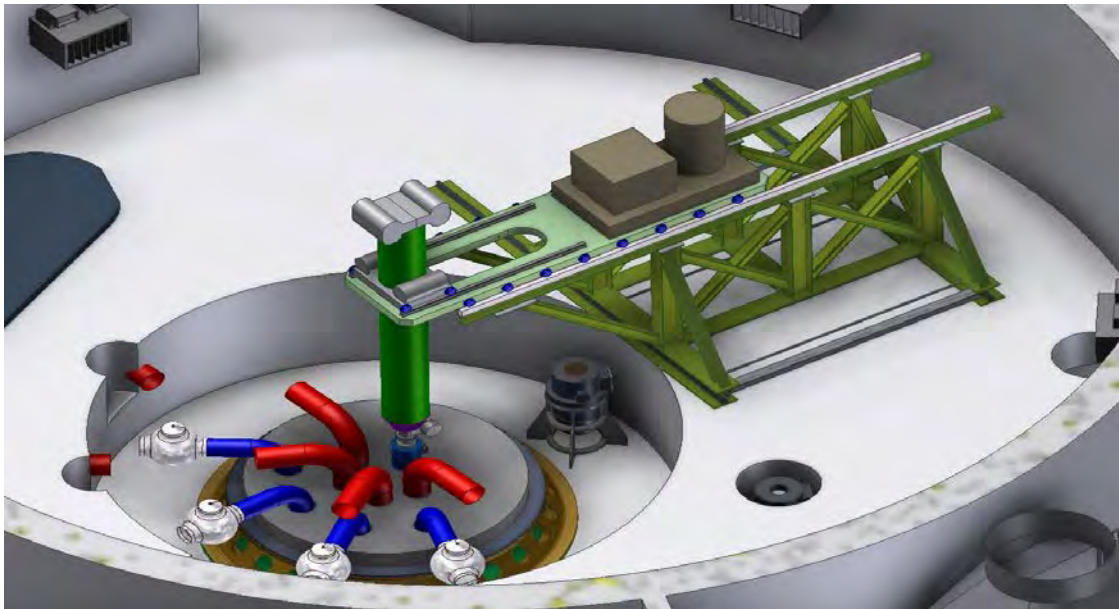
Fuel Unloading Machine – Over Reactor Vessel
